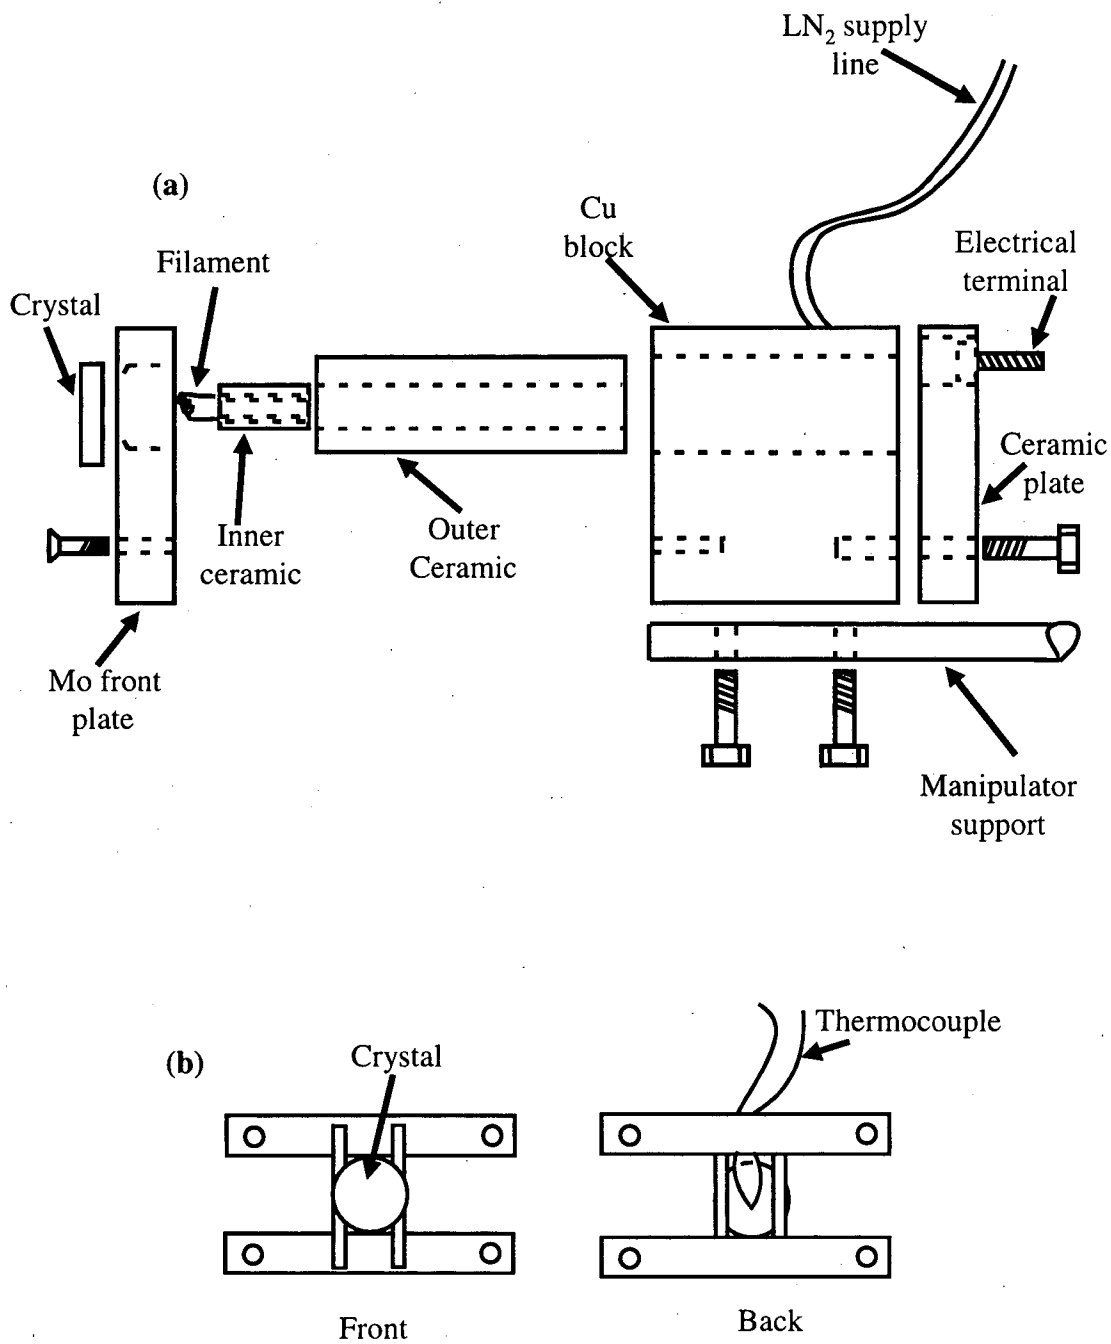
(a) Exploded side view of the manipulator heating and cooling assembly
